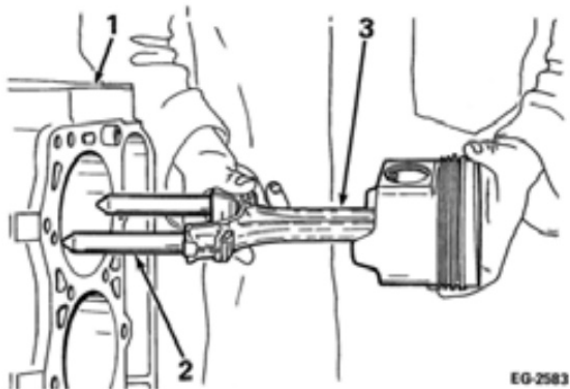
Removing Old Style Piston and Connecting Rod Assembly from Crankcase
